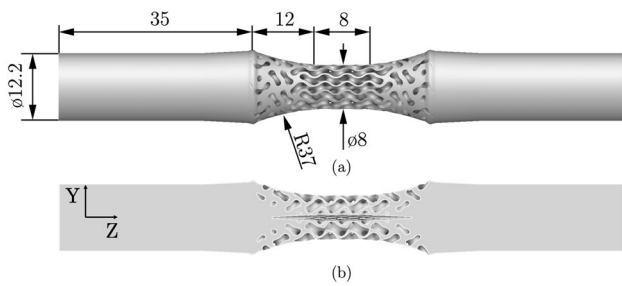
a Specimen geometry and exact dimensions, b YZ section of the specimen geometry showing the central cavity
